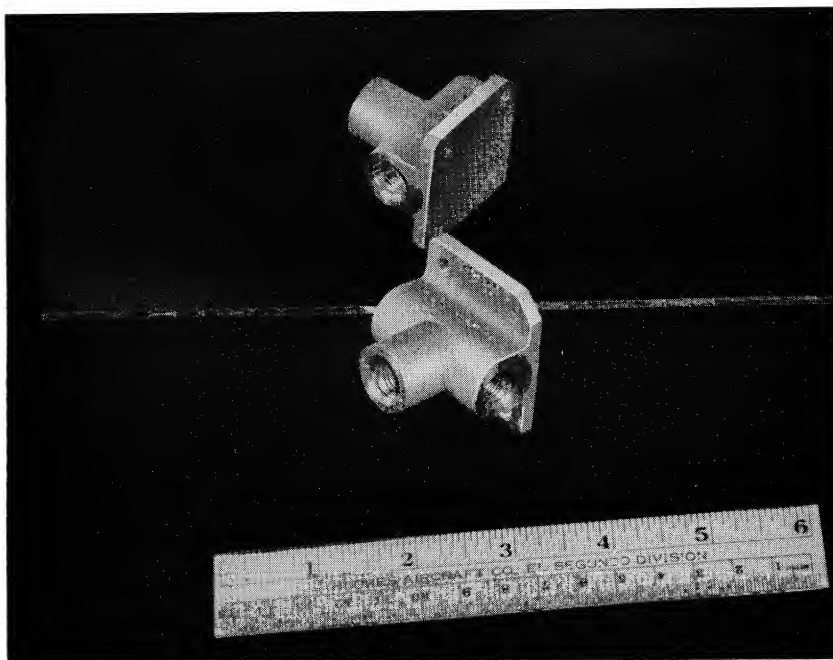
Only the milling and universal heads are used to complete this component in a single setup. Implementation for numerical-control machining required only one-fourth the man-hours necessary to plan and tool conventional equipment for the part.
